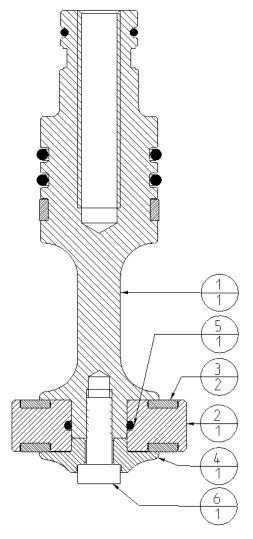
Spool assembly CO 3 way pneumatic valve size 1" 1/2: stainless steel casting
